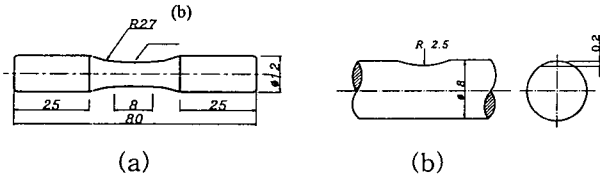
Configuration of cylindrical bulk material and specimen (unit : mm)
